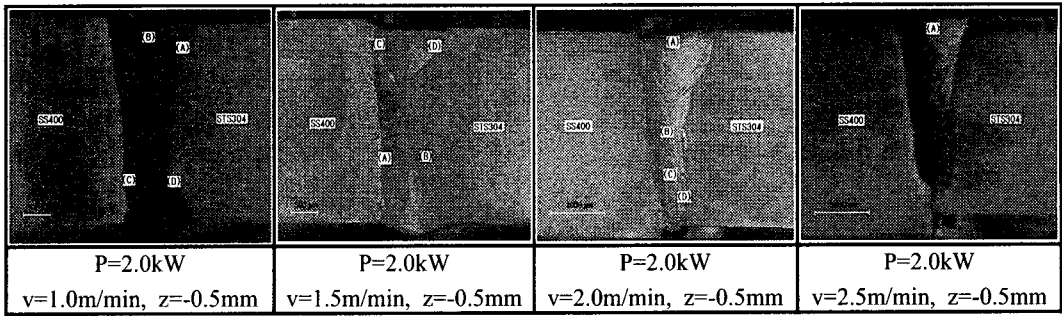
Welding Cross-section of SS400 and STS304 according to the laser beam speed
